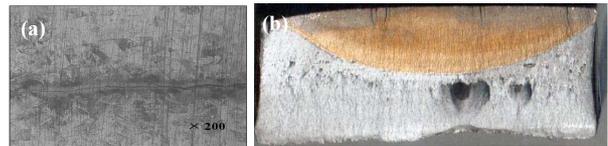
The crack by mechanical method (a) fatigue crack (b) fracture surface
